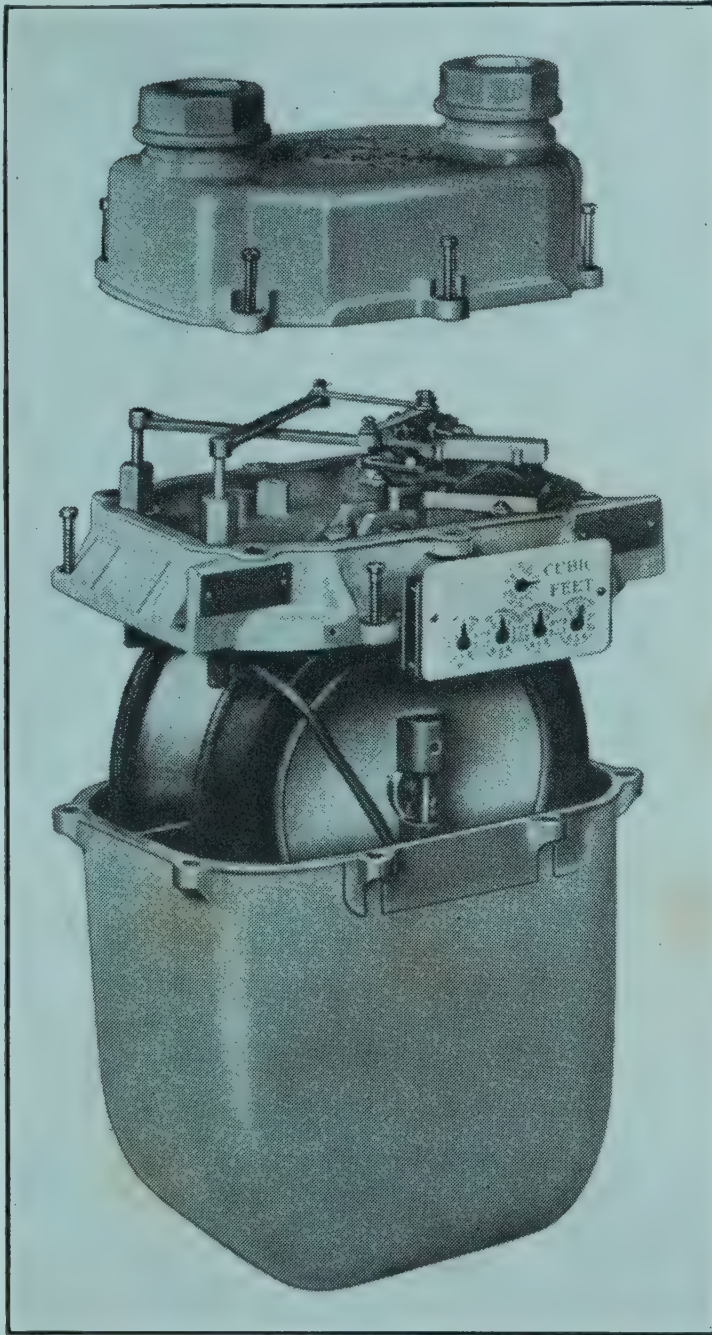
Bellows gas meter. (*Courtesy Pittsburgh Equitable Meter Division, Rockwell Manufacturing Co.*)
